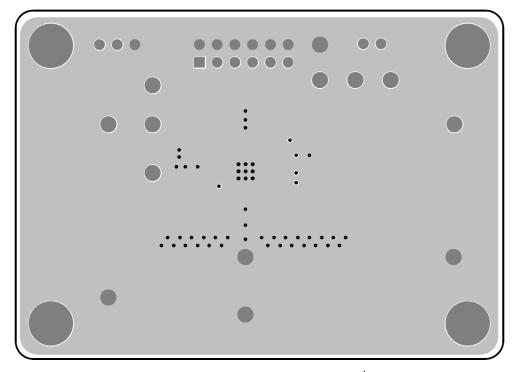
PCB Layout—Inner Side (2<sup>nd</sup> Layer)
